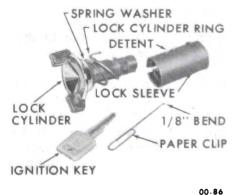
Separated Ignition Lock Cylinder and Lock Sleeve
